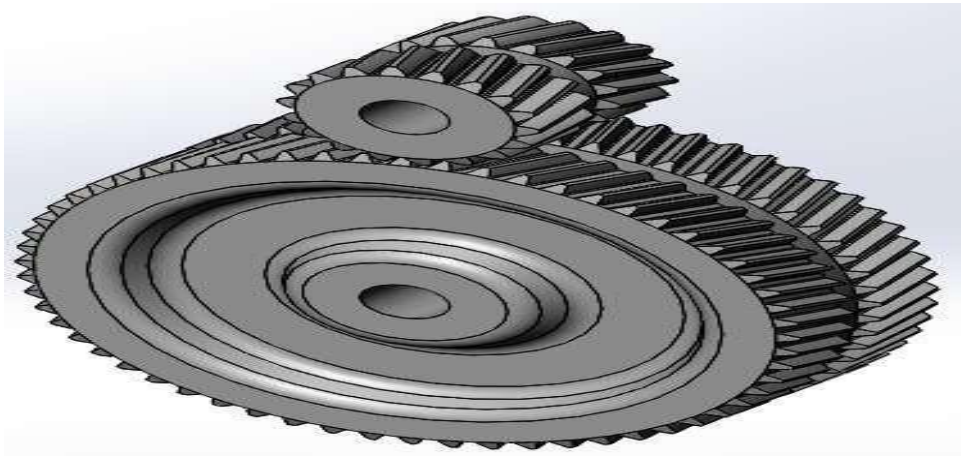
3D Model Assembly of Gear with Groove and Taper Edges Module 10 Gear Dia 636 & Dia 204
